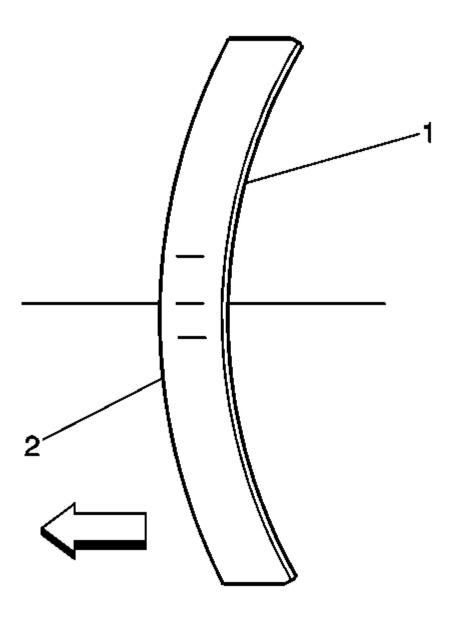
Crankshaft Balancer Washer Courtesy of GENERAL MOTORS CORP.
